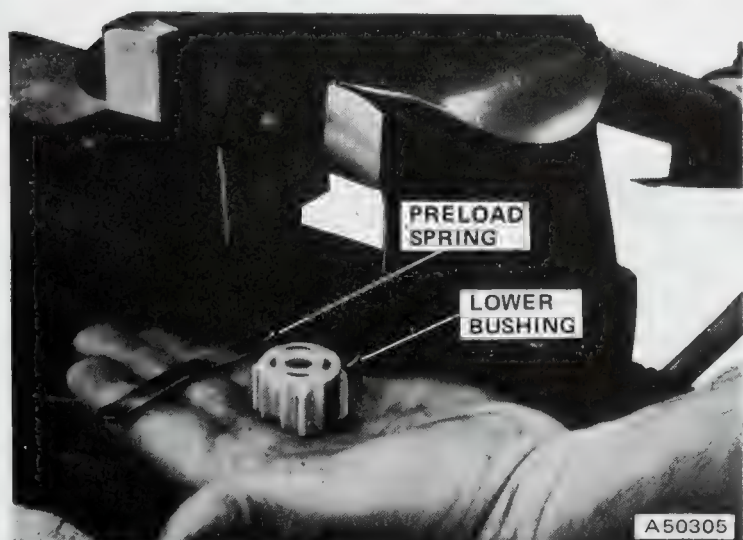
J-20 Lower Bushing and Preload Spring Removal
